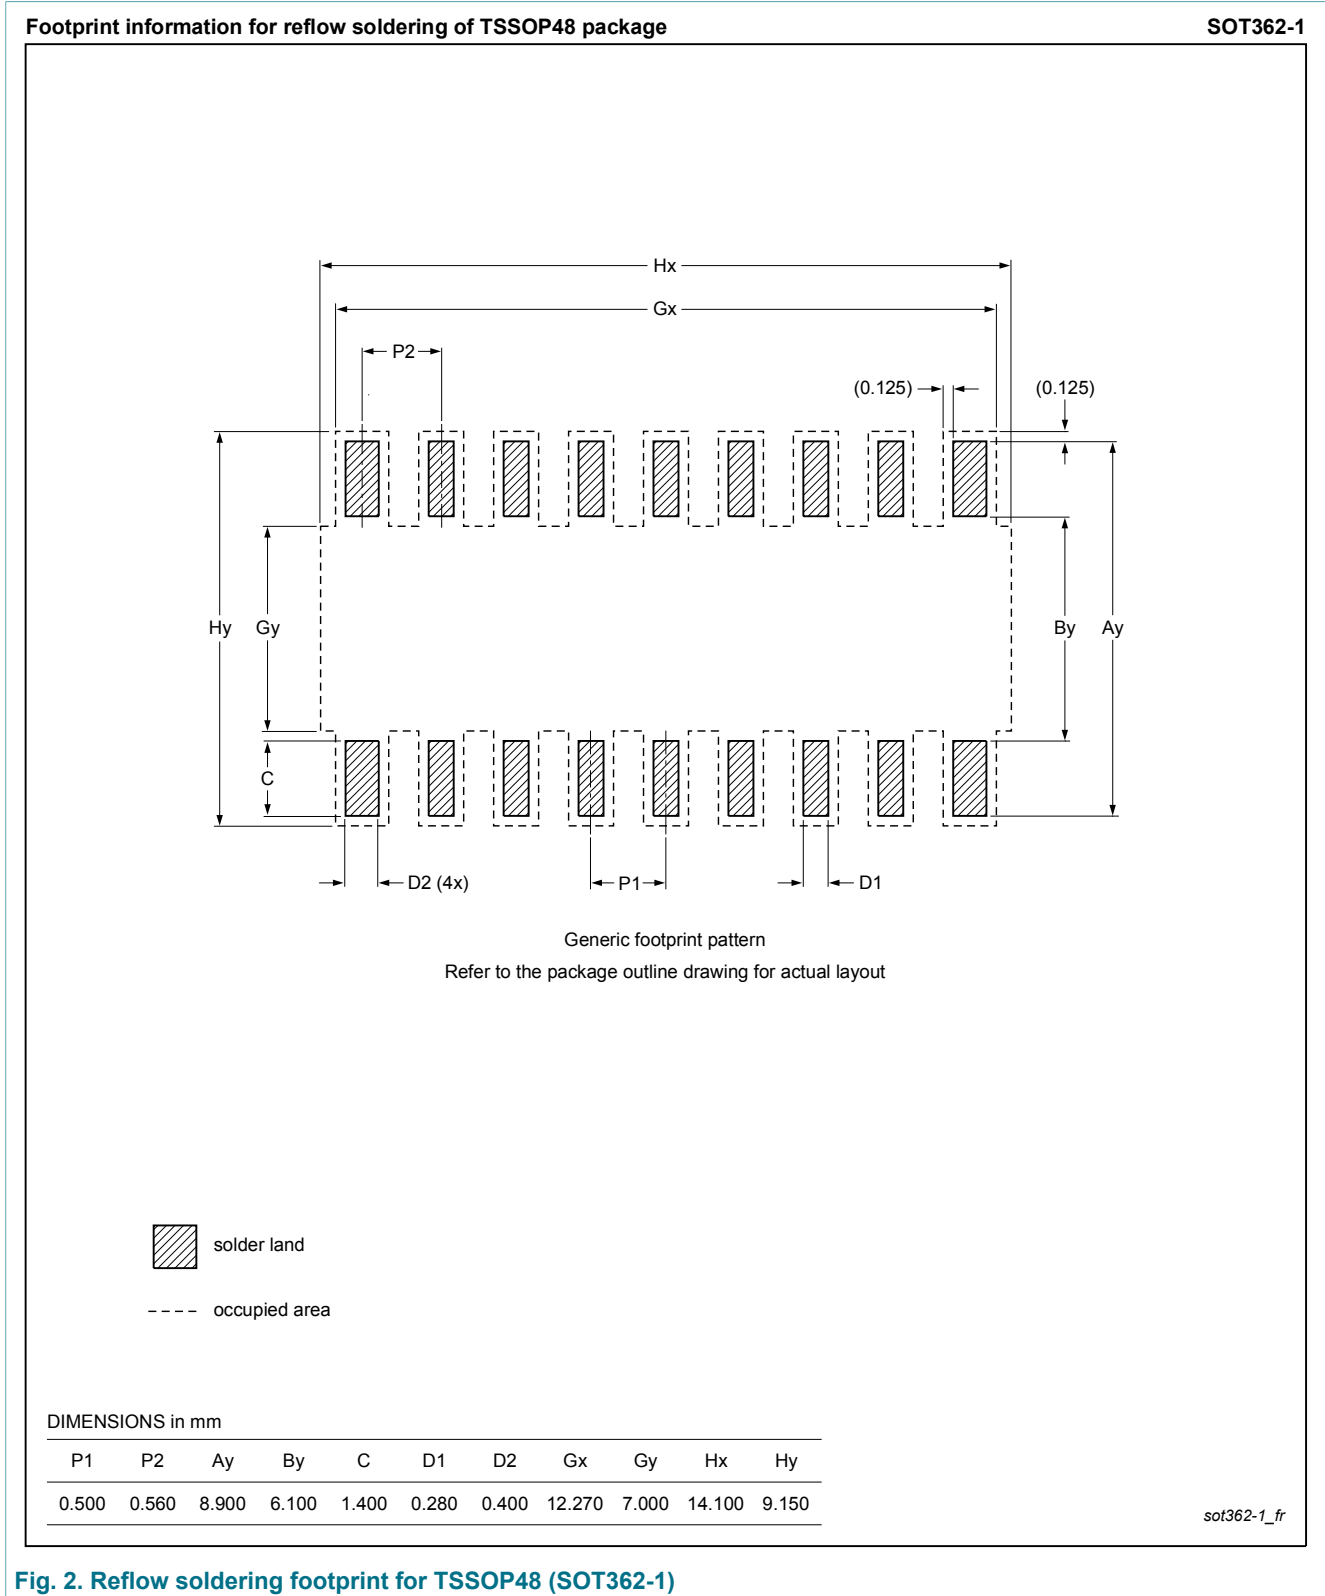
Reflow soldering footprint for TSSOP48 (SOT362-1)
